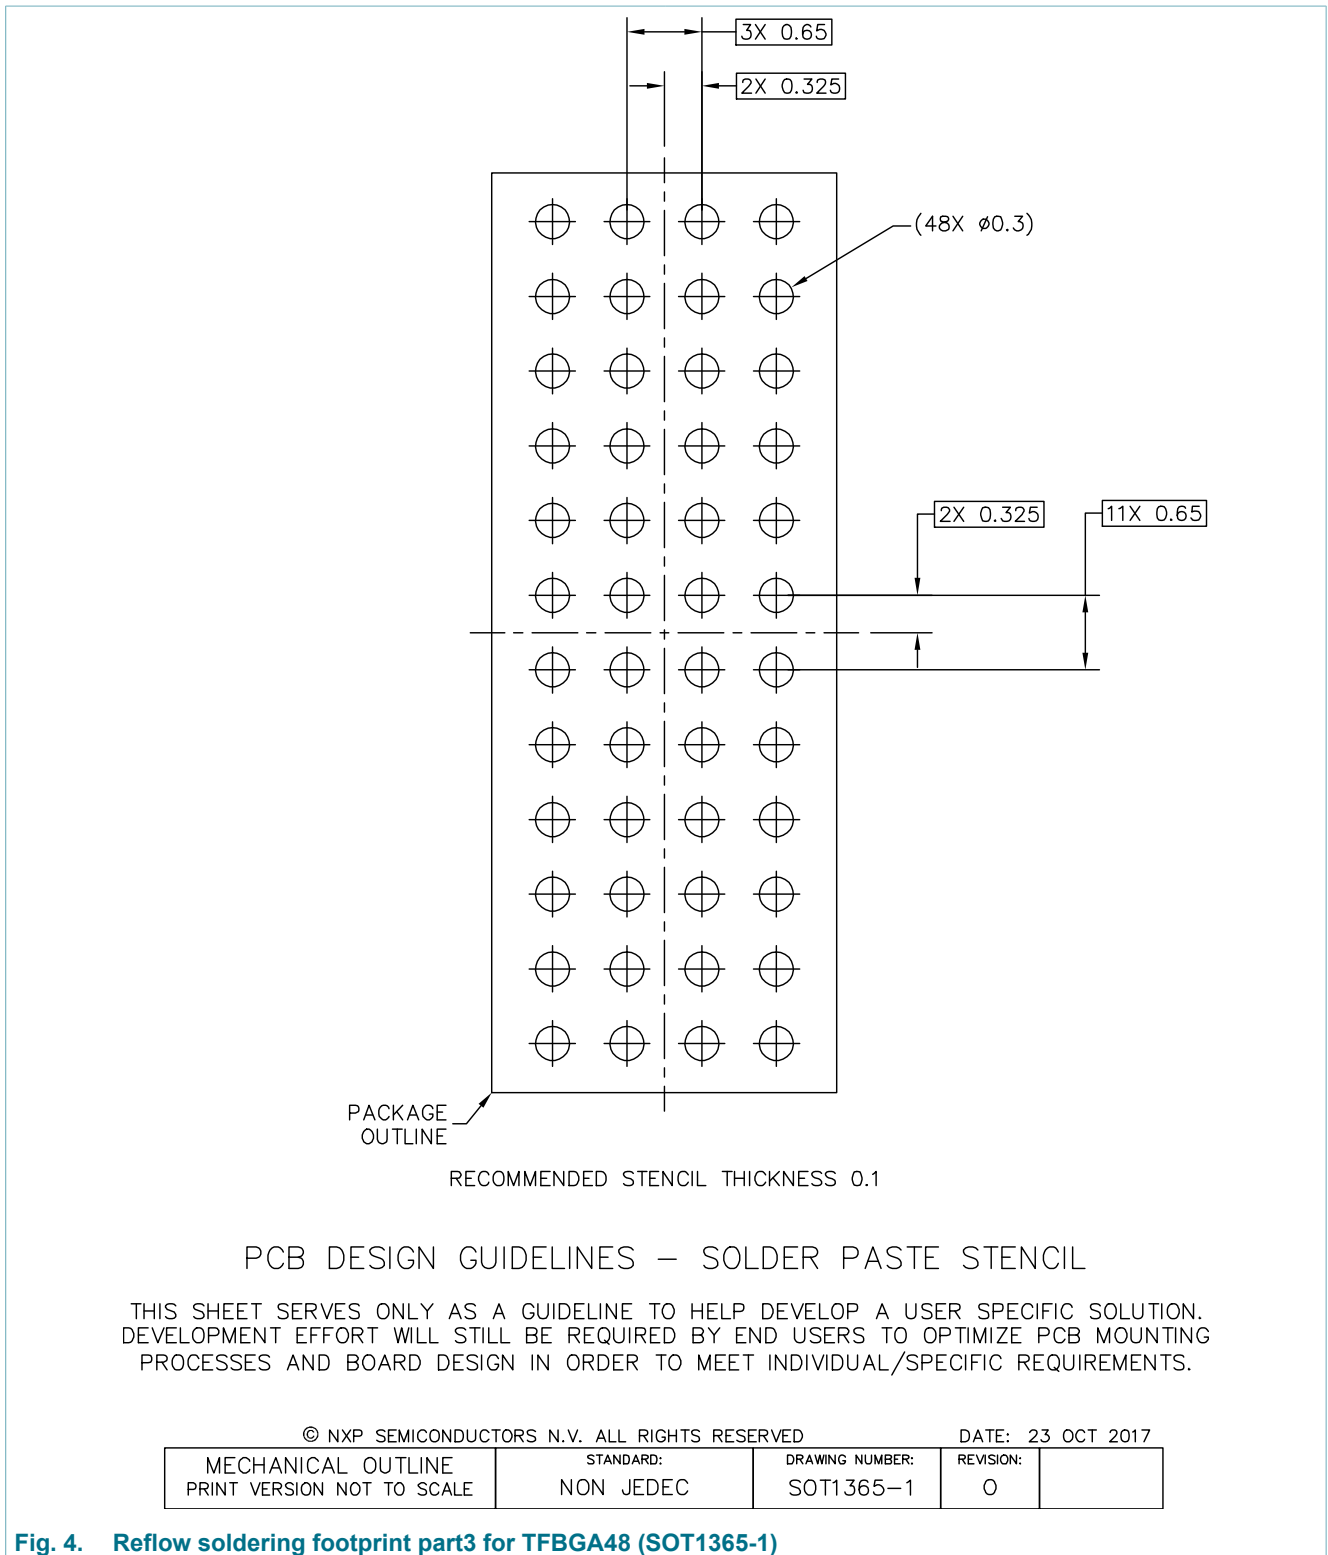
Reflow soldering footprint part3 for TFBGA48 (SOT1365-1)
